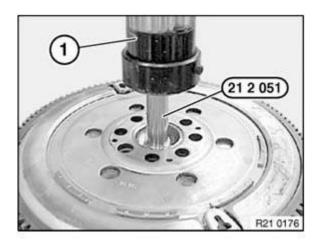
Pressing Out Dual-Mass Flywheel Using Hydraulic Press And Special Tool (21 2 051) Courtesy of BMW OF NORTH AMERICA, INC.
